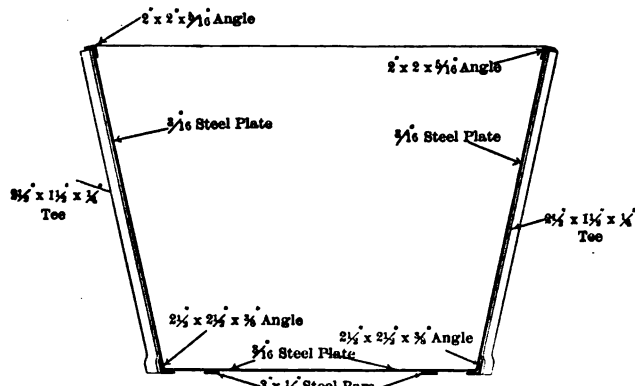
SECTION THROUGH STEEL DUMP WAGON BODY
